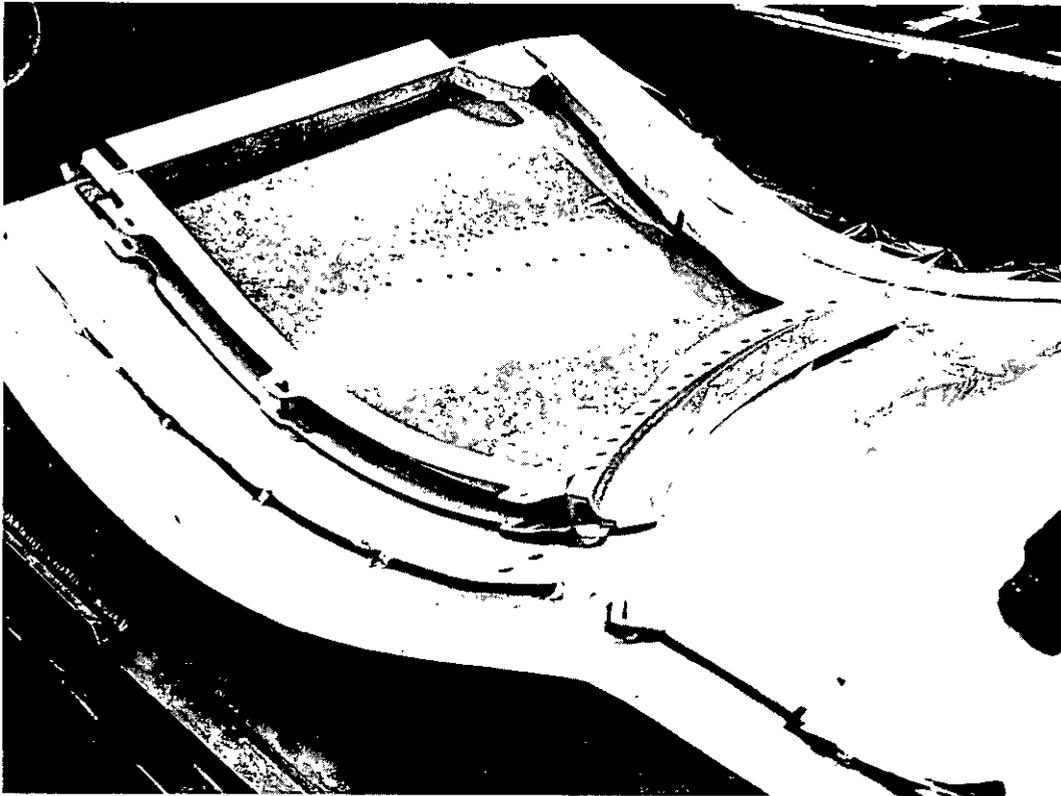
(b) Welded bonding tool showing fork lift hole-pinned details in place.
